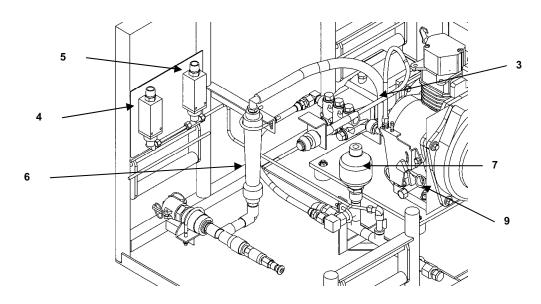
Switches, Meter, Dampener, and Throttle on High-Pressure Pump Module.
